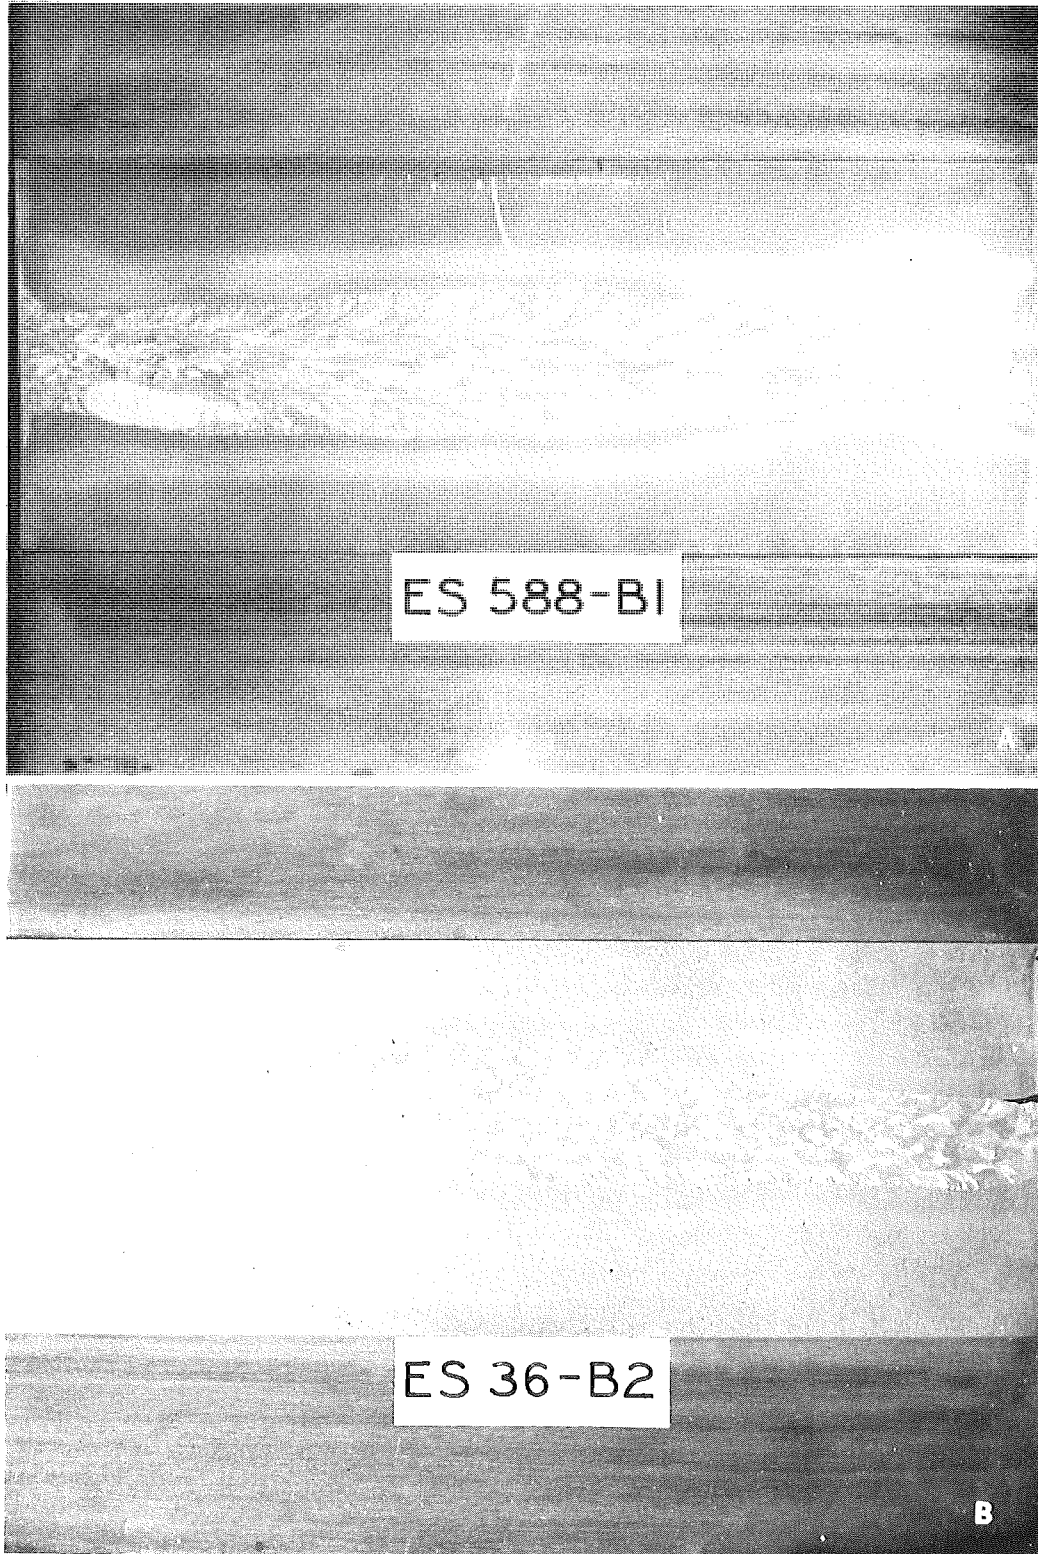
Typical longitudinal surface of the weld in dry shoe electroslag weldments made by Fabricator B in: A) 1-3/4-in. A 588 steel, B) 3-in. A 36 steel (see Fig. 12 on lack-of-fusion defect).
